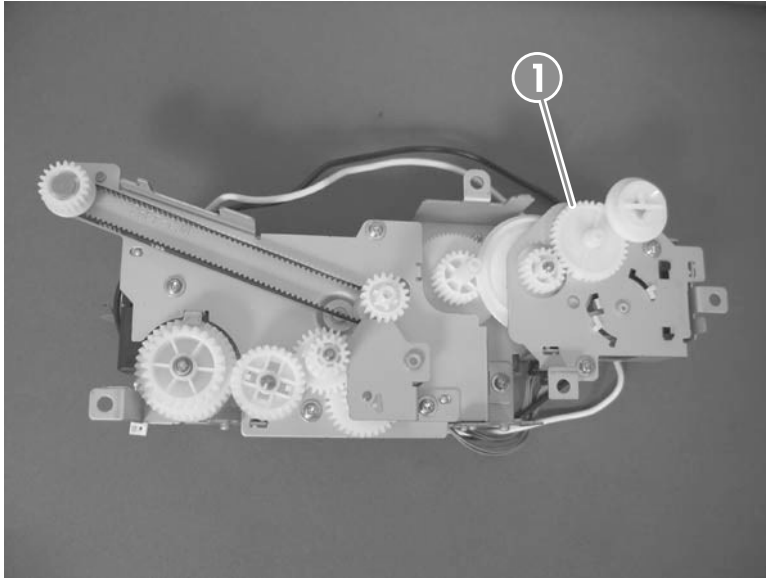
Remove the fuser-drive assembly (6 of 6)
